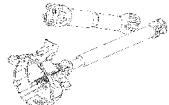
Use of the tool PRM 2326.1 - removal
